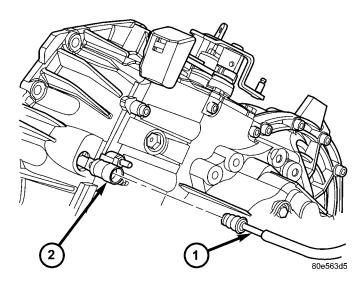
Clutch Slave Cylinder Hydraulic Connection—Diesel and Turbo Models
